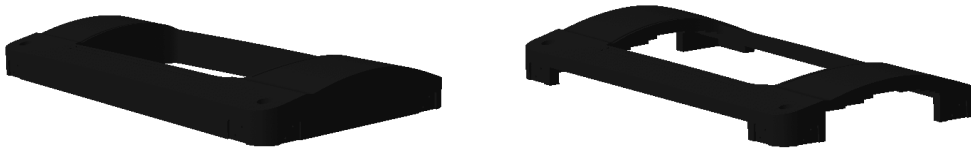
Blank holders a) rigid and b) torsion-elastic (universal)
